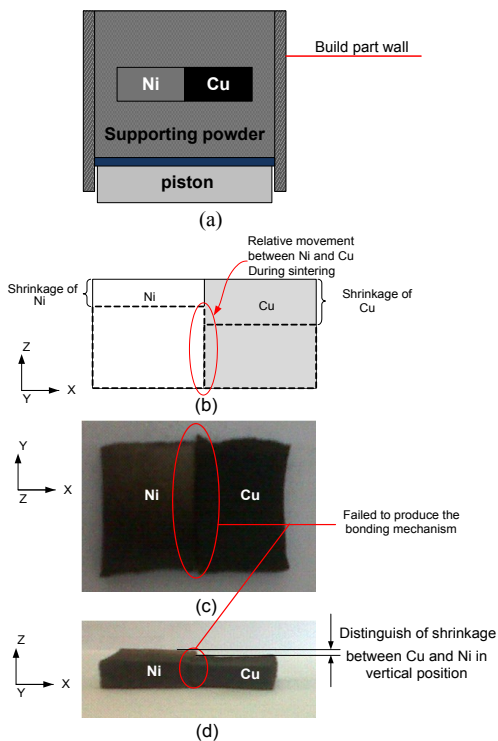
(a) Sintering Formation in a Building Part, (b) Relative Movement Due to Shrinkage of Ni and Cu which Failed to Establish a Bonding Mechanism, (c) Top View of Multi Materials Sintered Product, (d) Side View of Sintered Product
